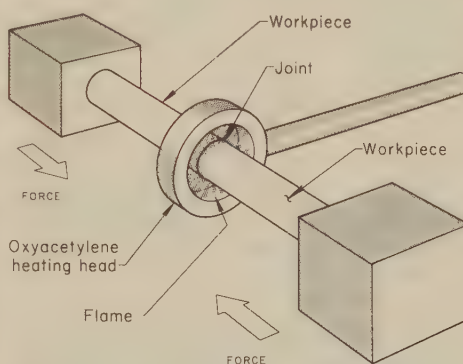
Setup for heating workpieces for closed-gap oxyacetylene pressure welding
